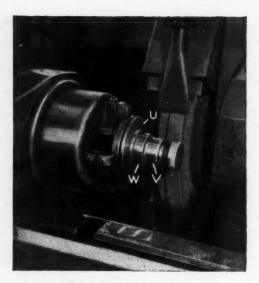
The set-up for grinding rear hubs on a Jones-Shipman machine, fitted with two abrasive wheels separated by a spacer. Grinding is performed in roughing and finishing stages
